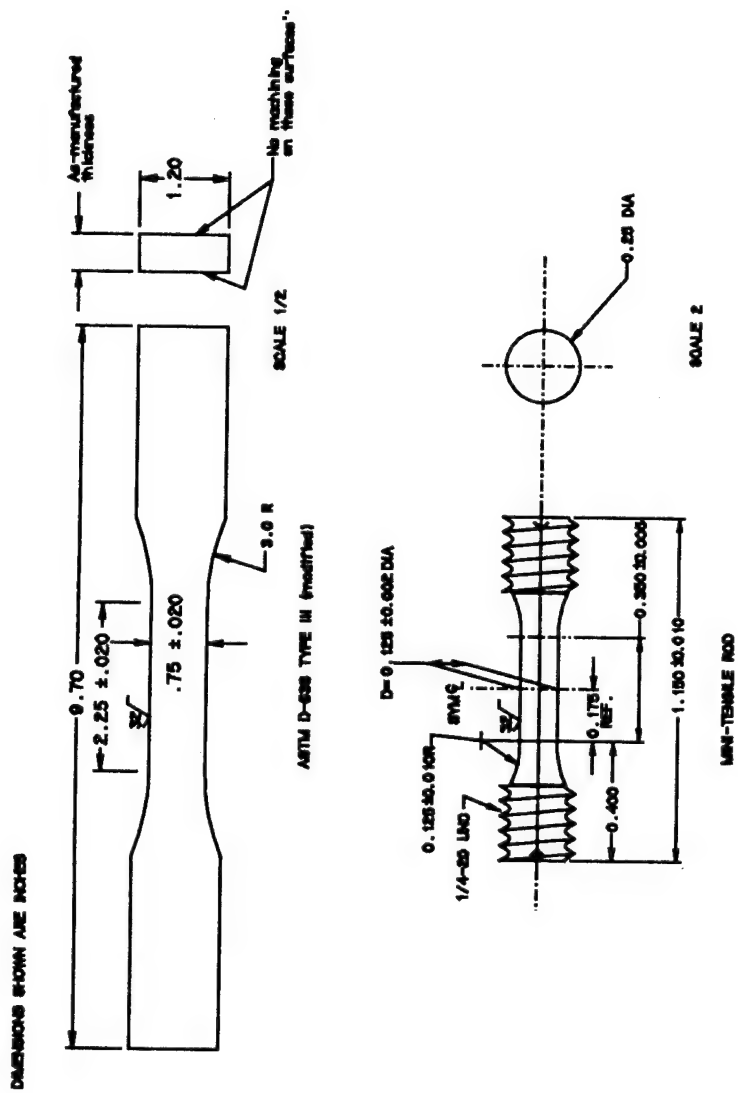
Specimens Used for Tension Tests on Flat and Conical Panels.
